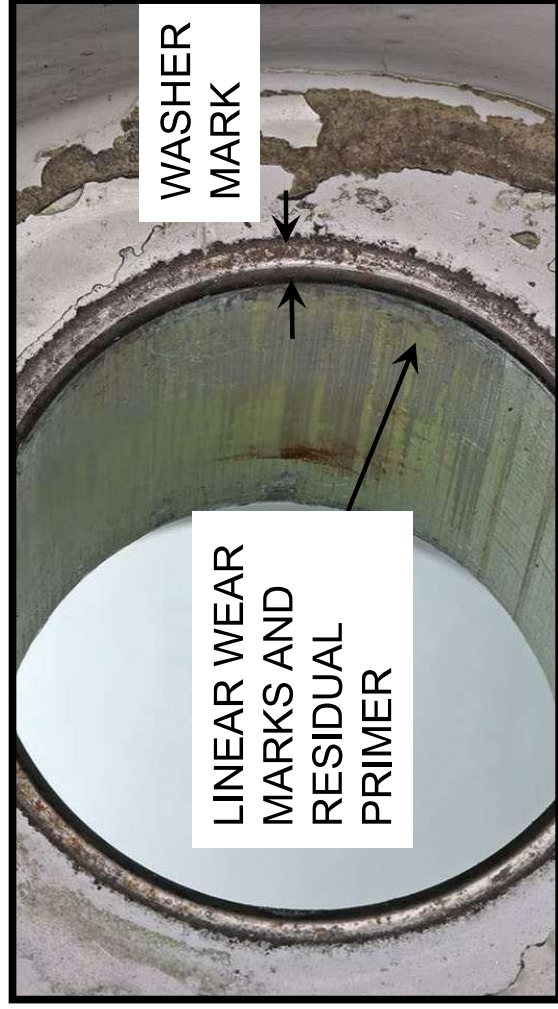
Detailed view of Lower Drag Strut- Tee Bolt Bore Diameter.
